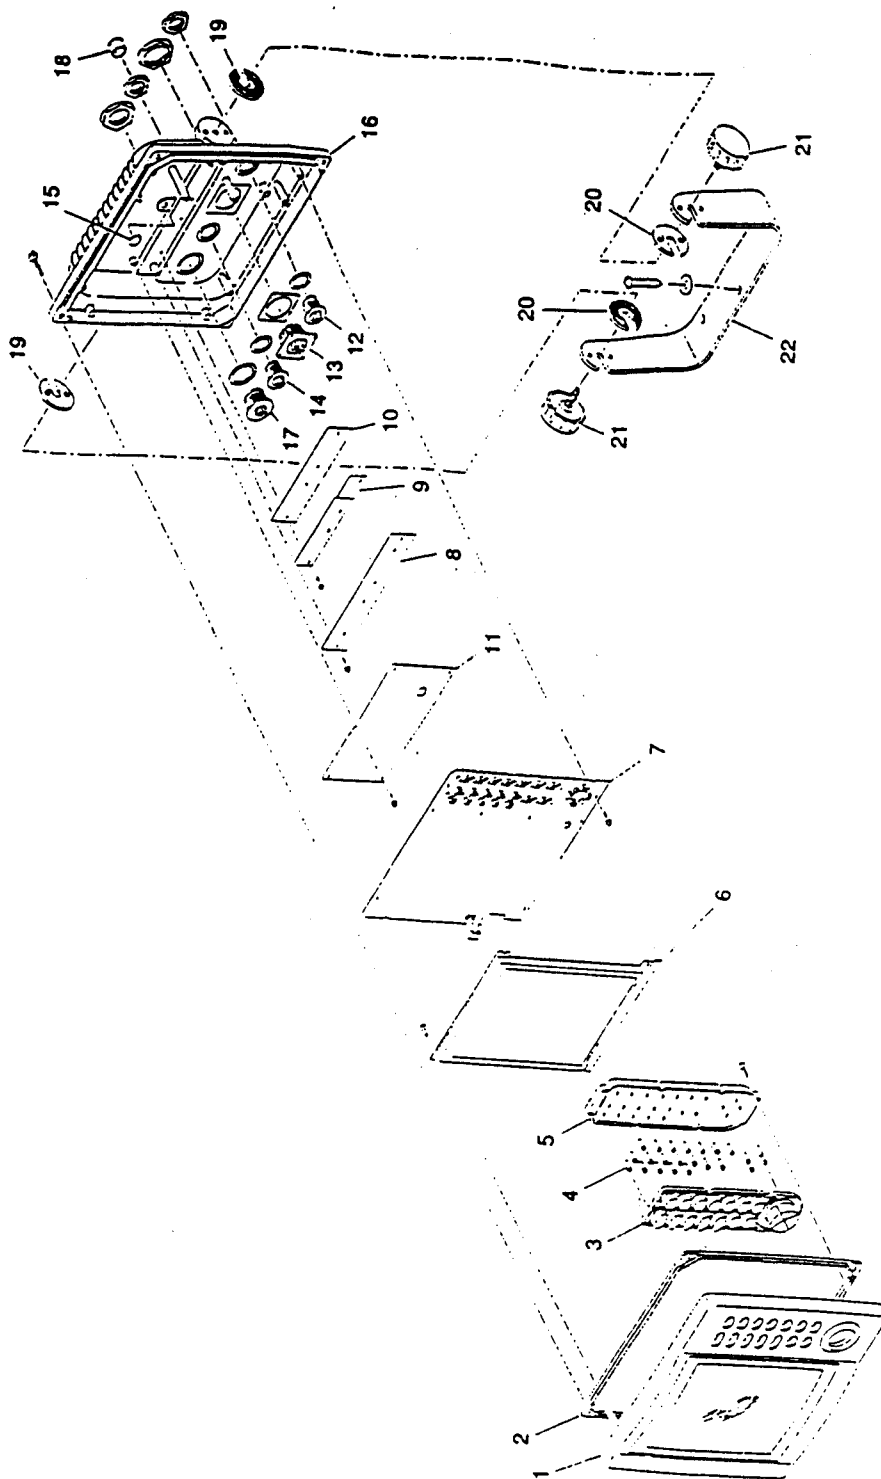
ASSEMBLY DRAWING, RL9 DISPLAY UNIT
